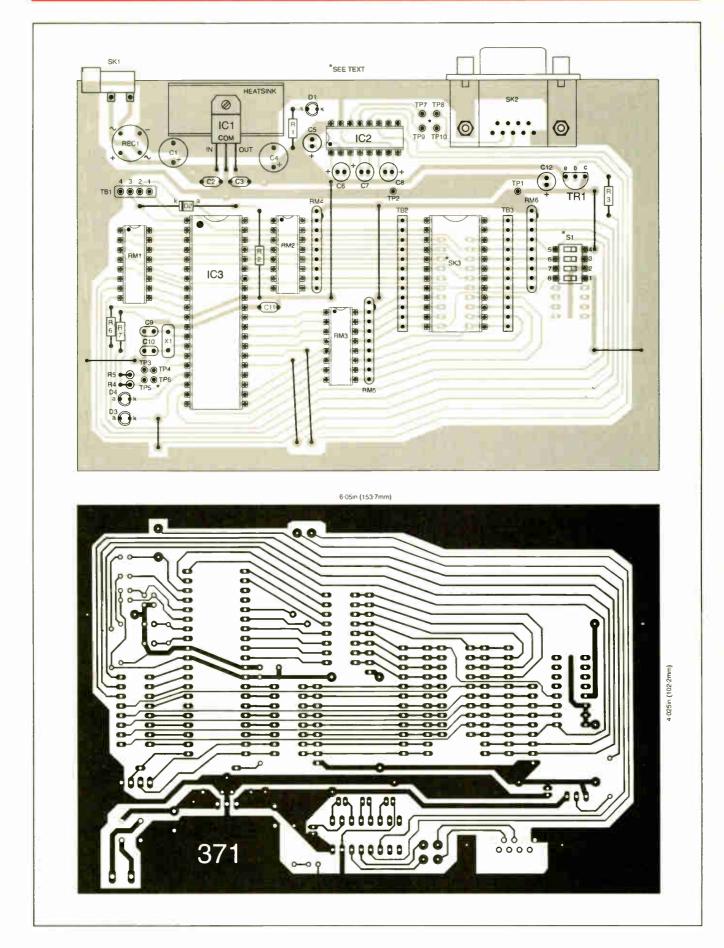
Printed circuit board component layout and full size copper foil master track pattern.
